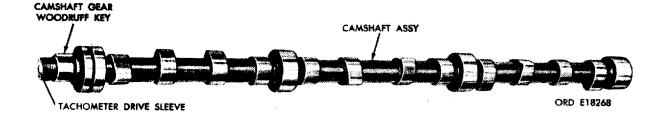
CAMSHAFT ASSEMBLY AS REMOVED FROM ENGINE.
